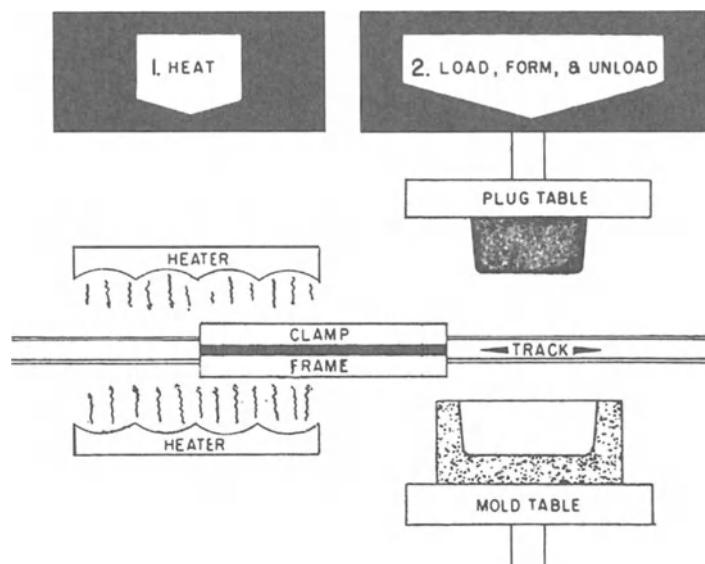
Schematic of a single-stage thermoforming machine.
